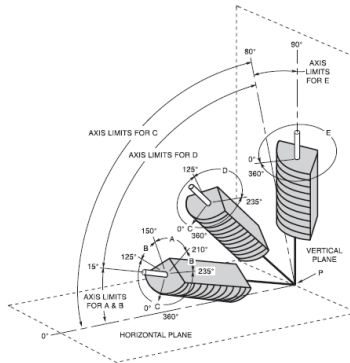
Positions of Fillet Welds (see 4.3.4)
